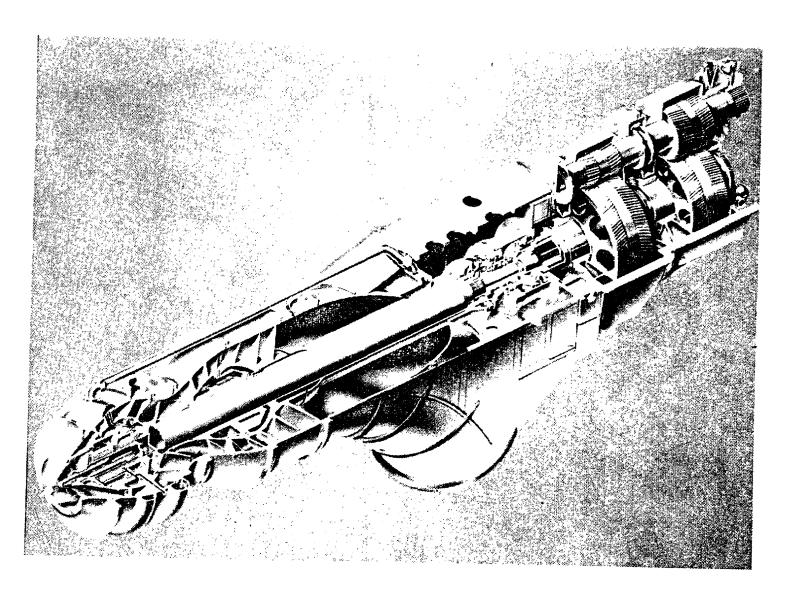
(U): Waterjet Propulsor Assembly (U)
